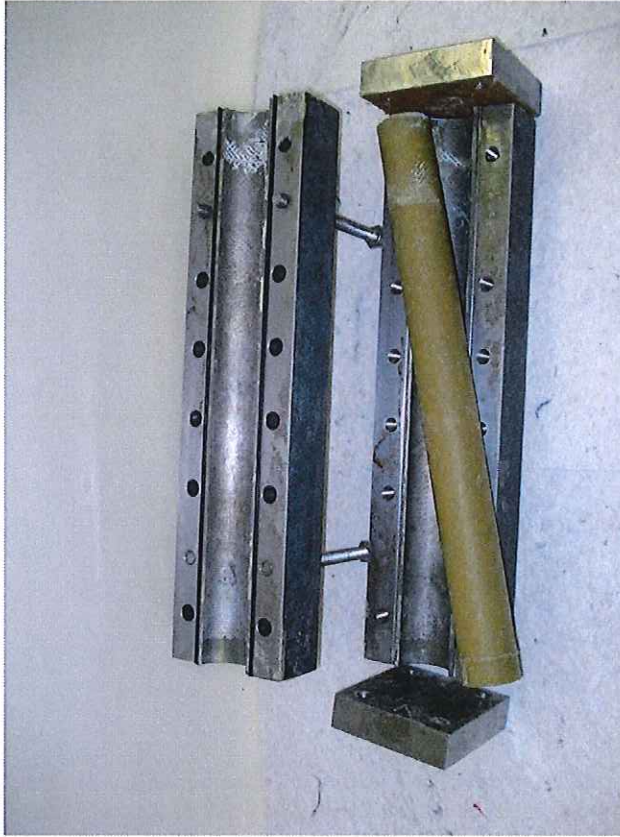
The steel mal in which the PC® Leakinject UNI 6816/E is cured under pressure consists out of 4 pieces.
